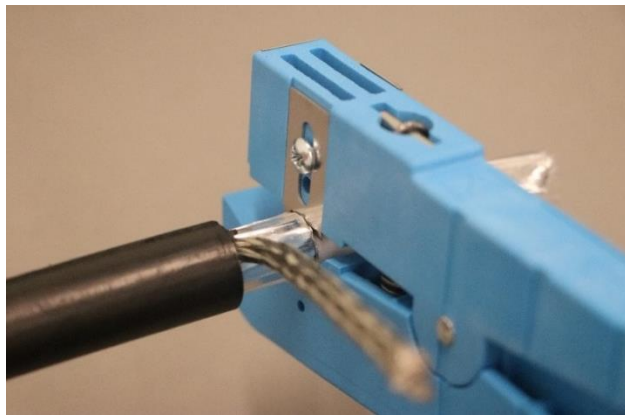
Ring cutting the shield and foam dielectric with adjustable blade ringer tool placed on the material to be removed
